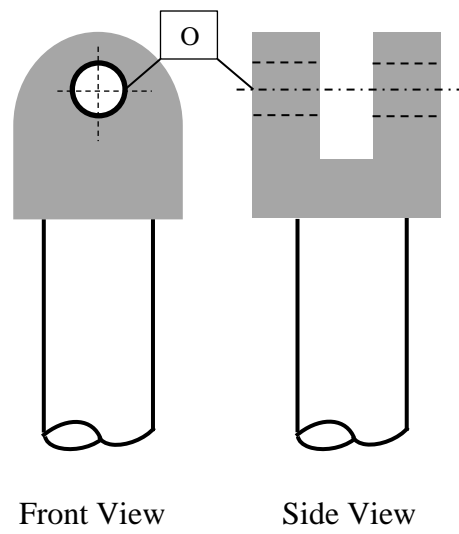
Grips used to hold the clamps in the Instron machine by passing a pin through hole 'O' in the clamps and the grips.
